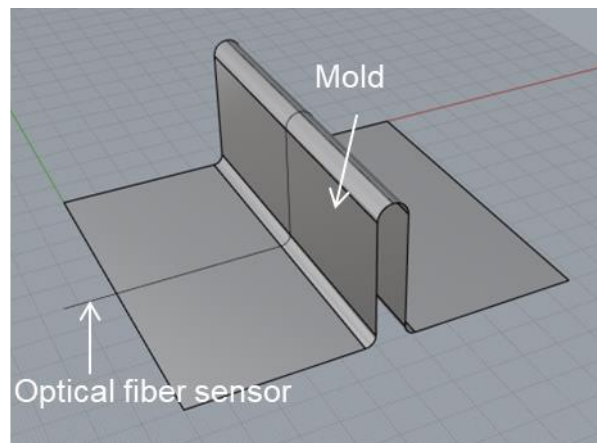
Mold and bending optical fiber sensor drawing by Rhinoceros of 3D CAD soft.
